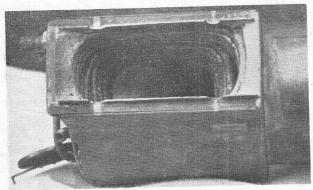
View from underside of flash boiler, showing fire-box coils.
